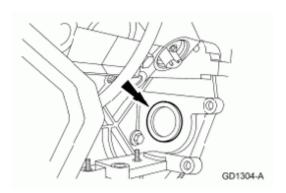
Locating Cylinder Block Opening Cover Courtesy of FORD MOTOR CO.
